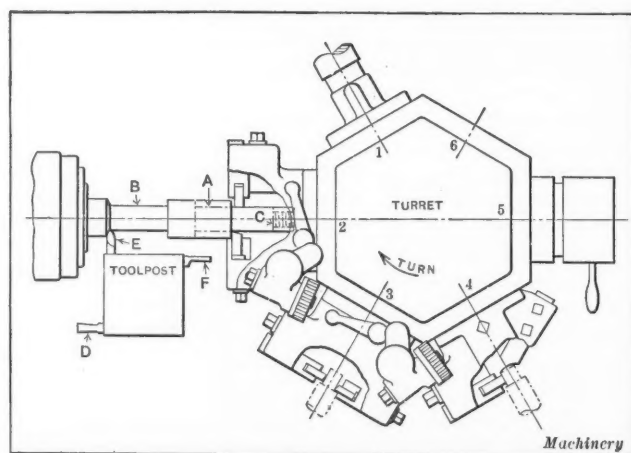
Lay-out of Tools used to manufacture Work shown in Fig. 18
